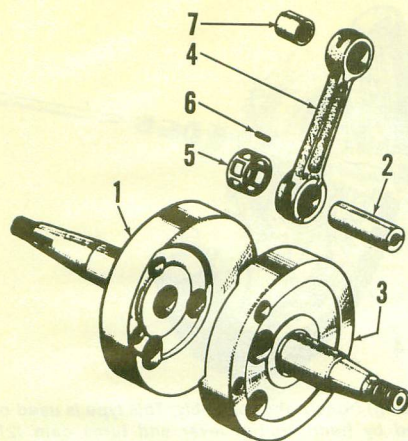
Exploded view of typical press together crankshaft assembly. Many manufacturers have preassembled complete units available as service part.
